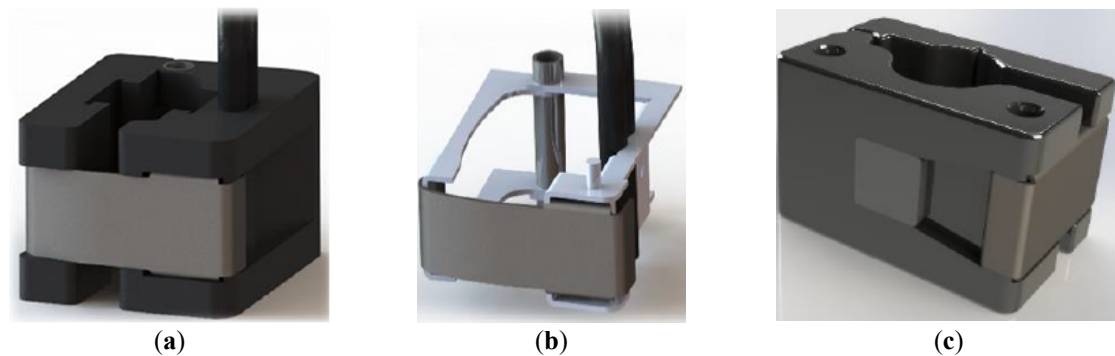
(a) coupling system with the mechanical pressure locker, (b) metal insert in which the mechanism is supported, (c) tube locker button.
